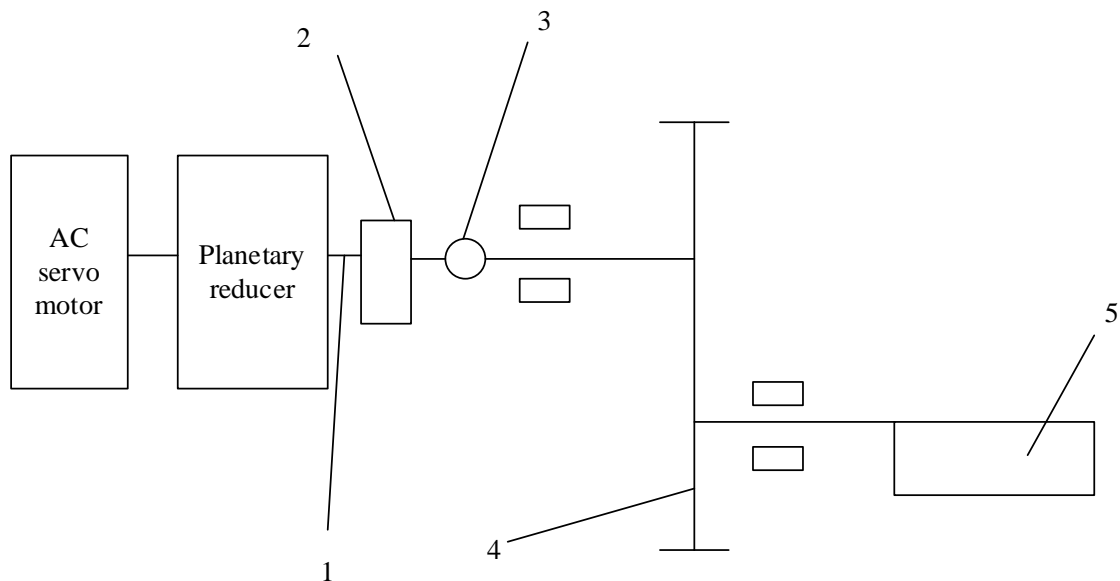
Feed servo system model (1: Screw; 2: Spindle box; 3: Cutting tools; 4: Gears to be processed; 5: Turntable)
